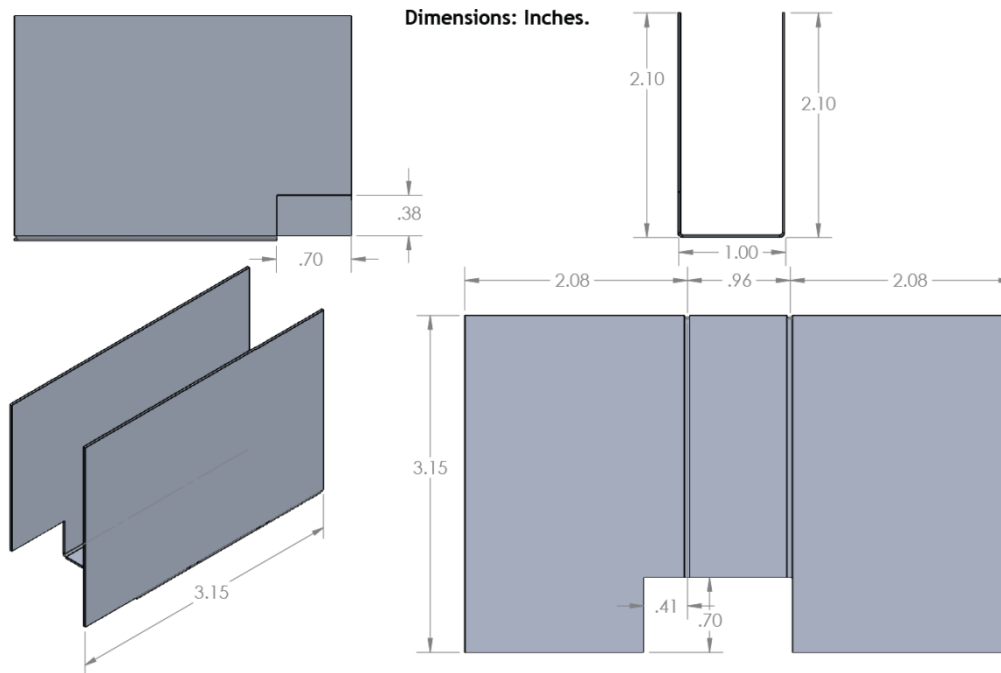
Aluminum 3003 Sheet (25 mils thick) Dimensions.
